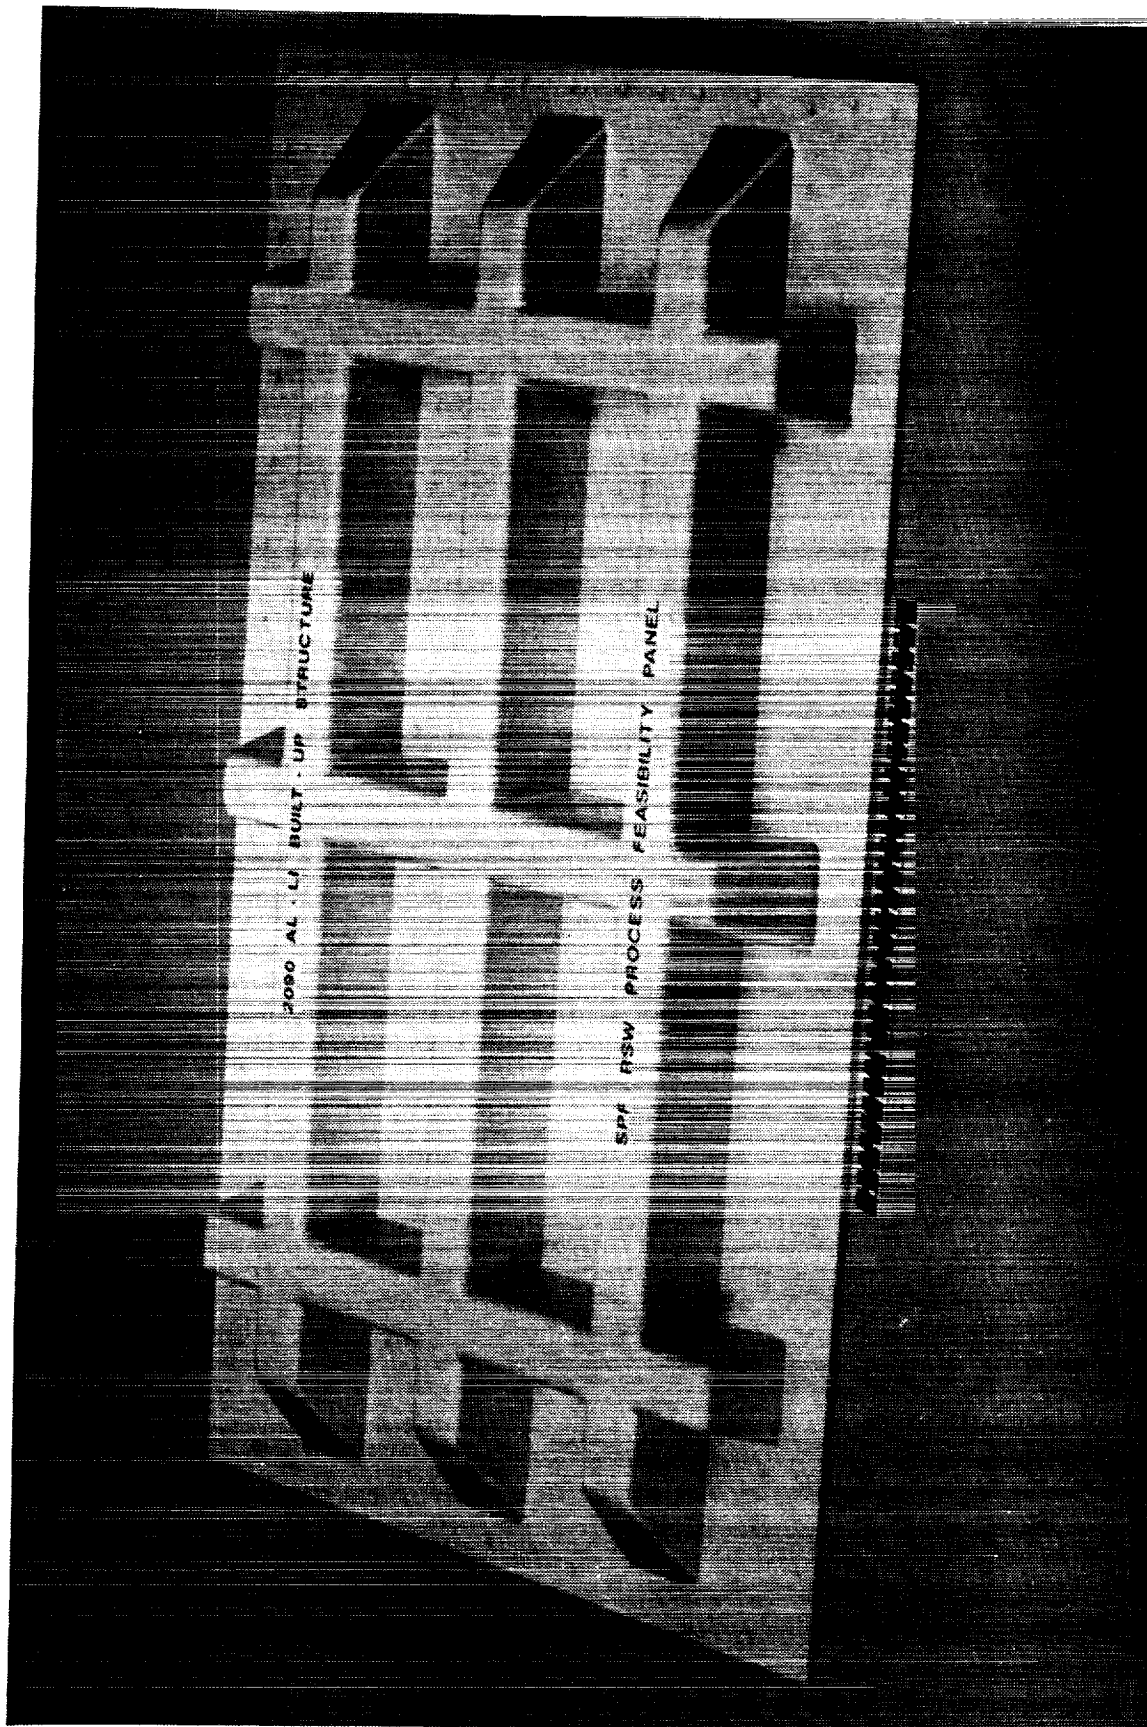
Welded and Trimmed Integrally Stiffened Panel.
